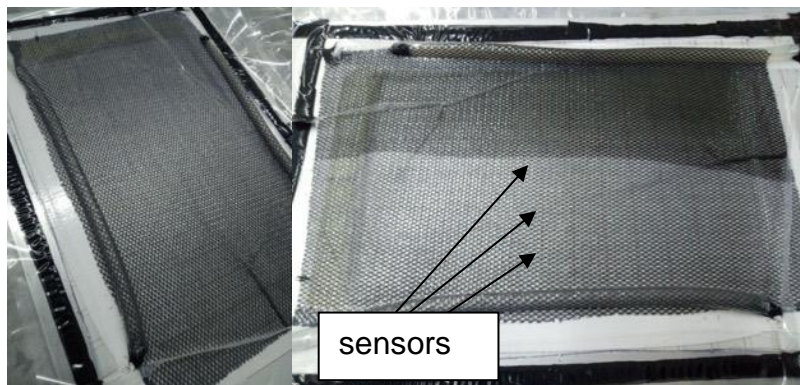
Manufacturing samples by infusion method (to be tested by E. O. Paton Electric Welding Institute)
